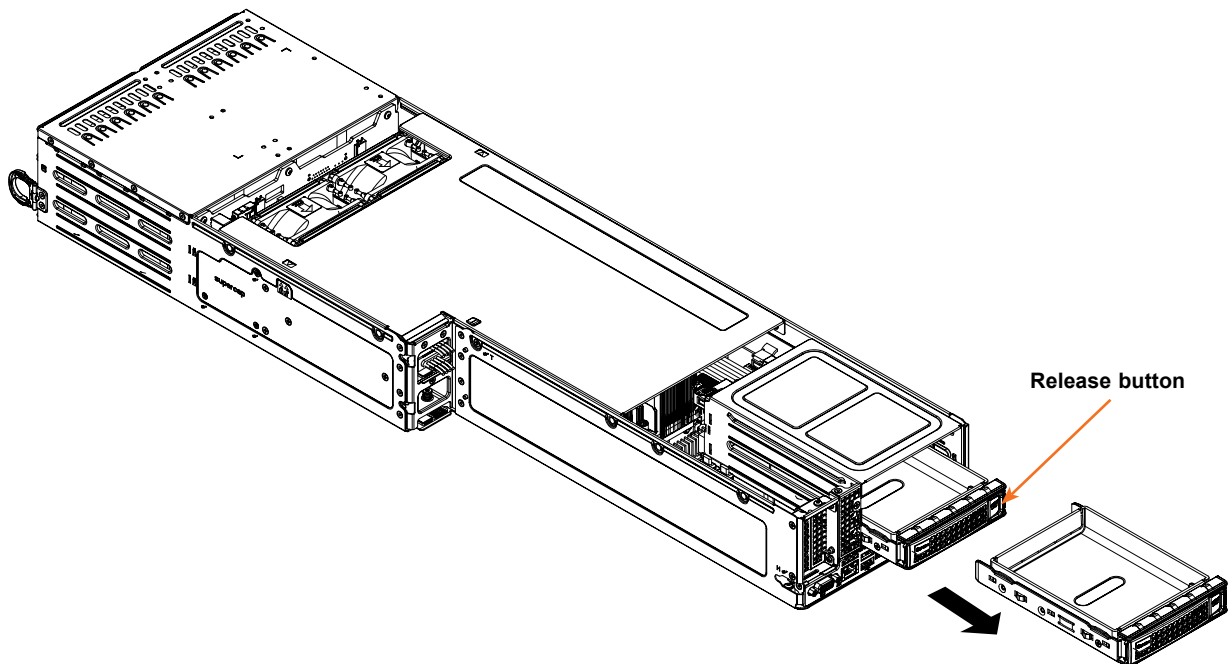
Removing a Hard Drive Carrier (rear drives shown)
